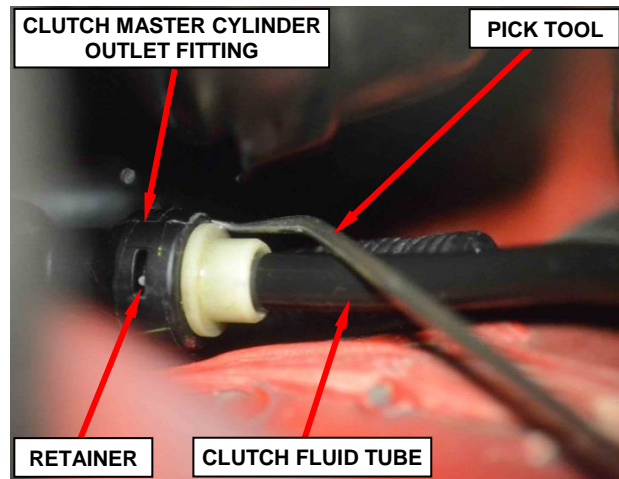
Clutch Fluid Tube at Clutch Master Cylinder Outlet Fitting
